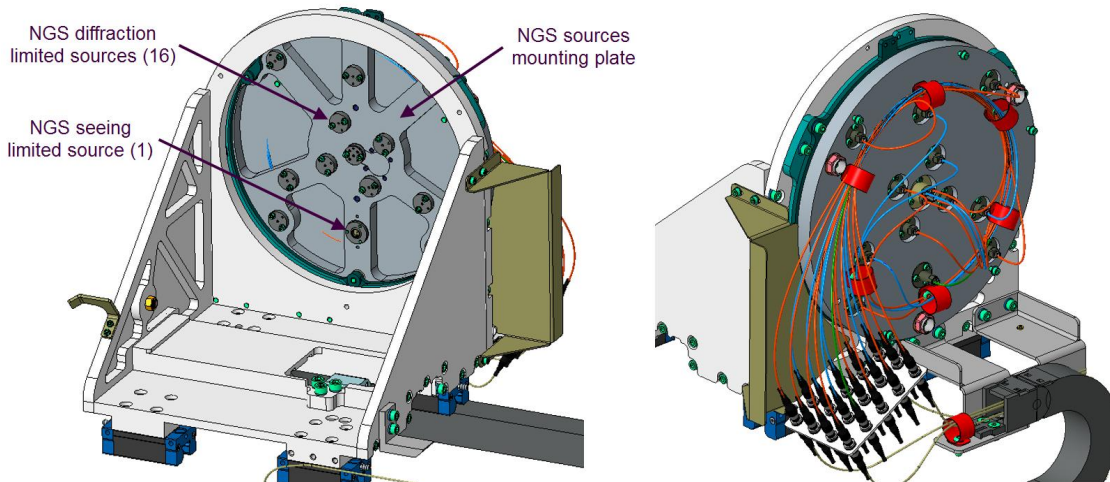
NGS source assembly. (Left) NGS assembly front view, (Right) NGS assembly rear view.
